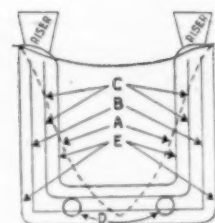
METHOD OF WELDING PATCHED KETTLE LIP
